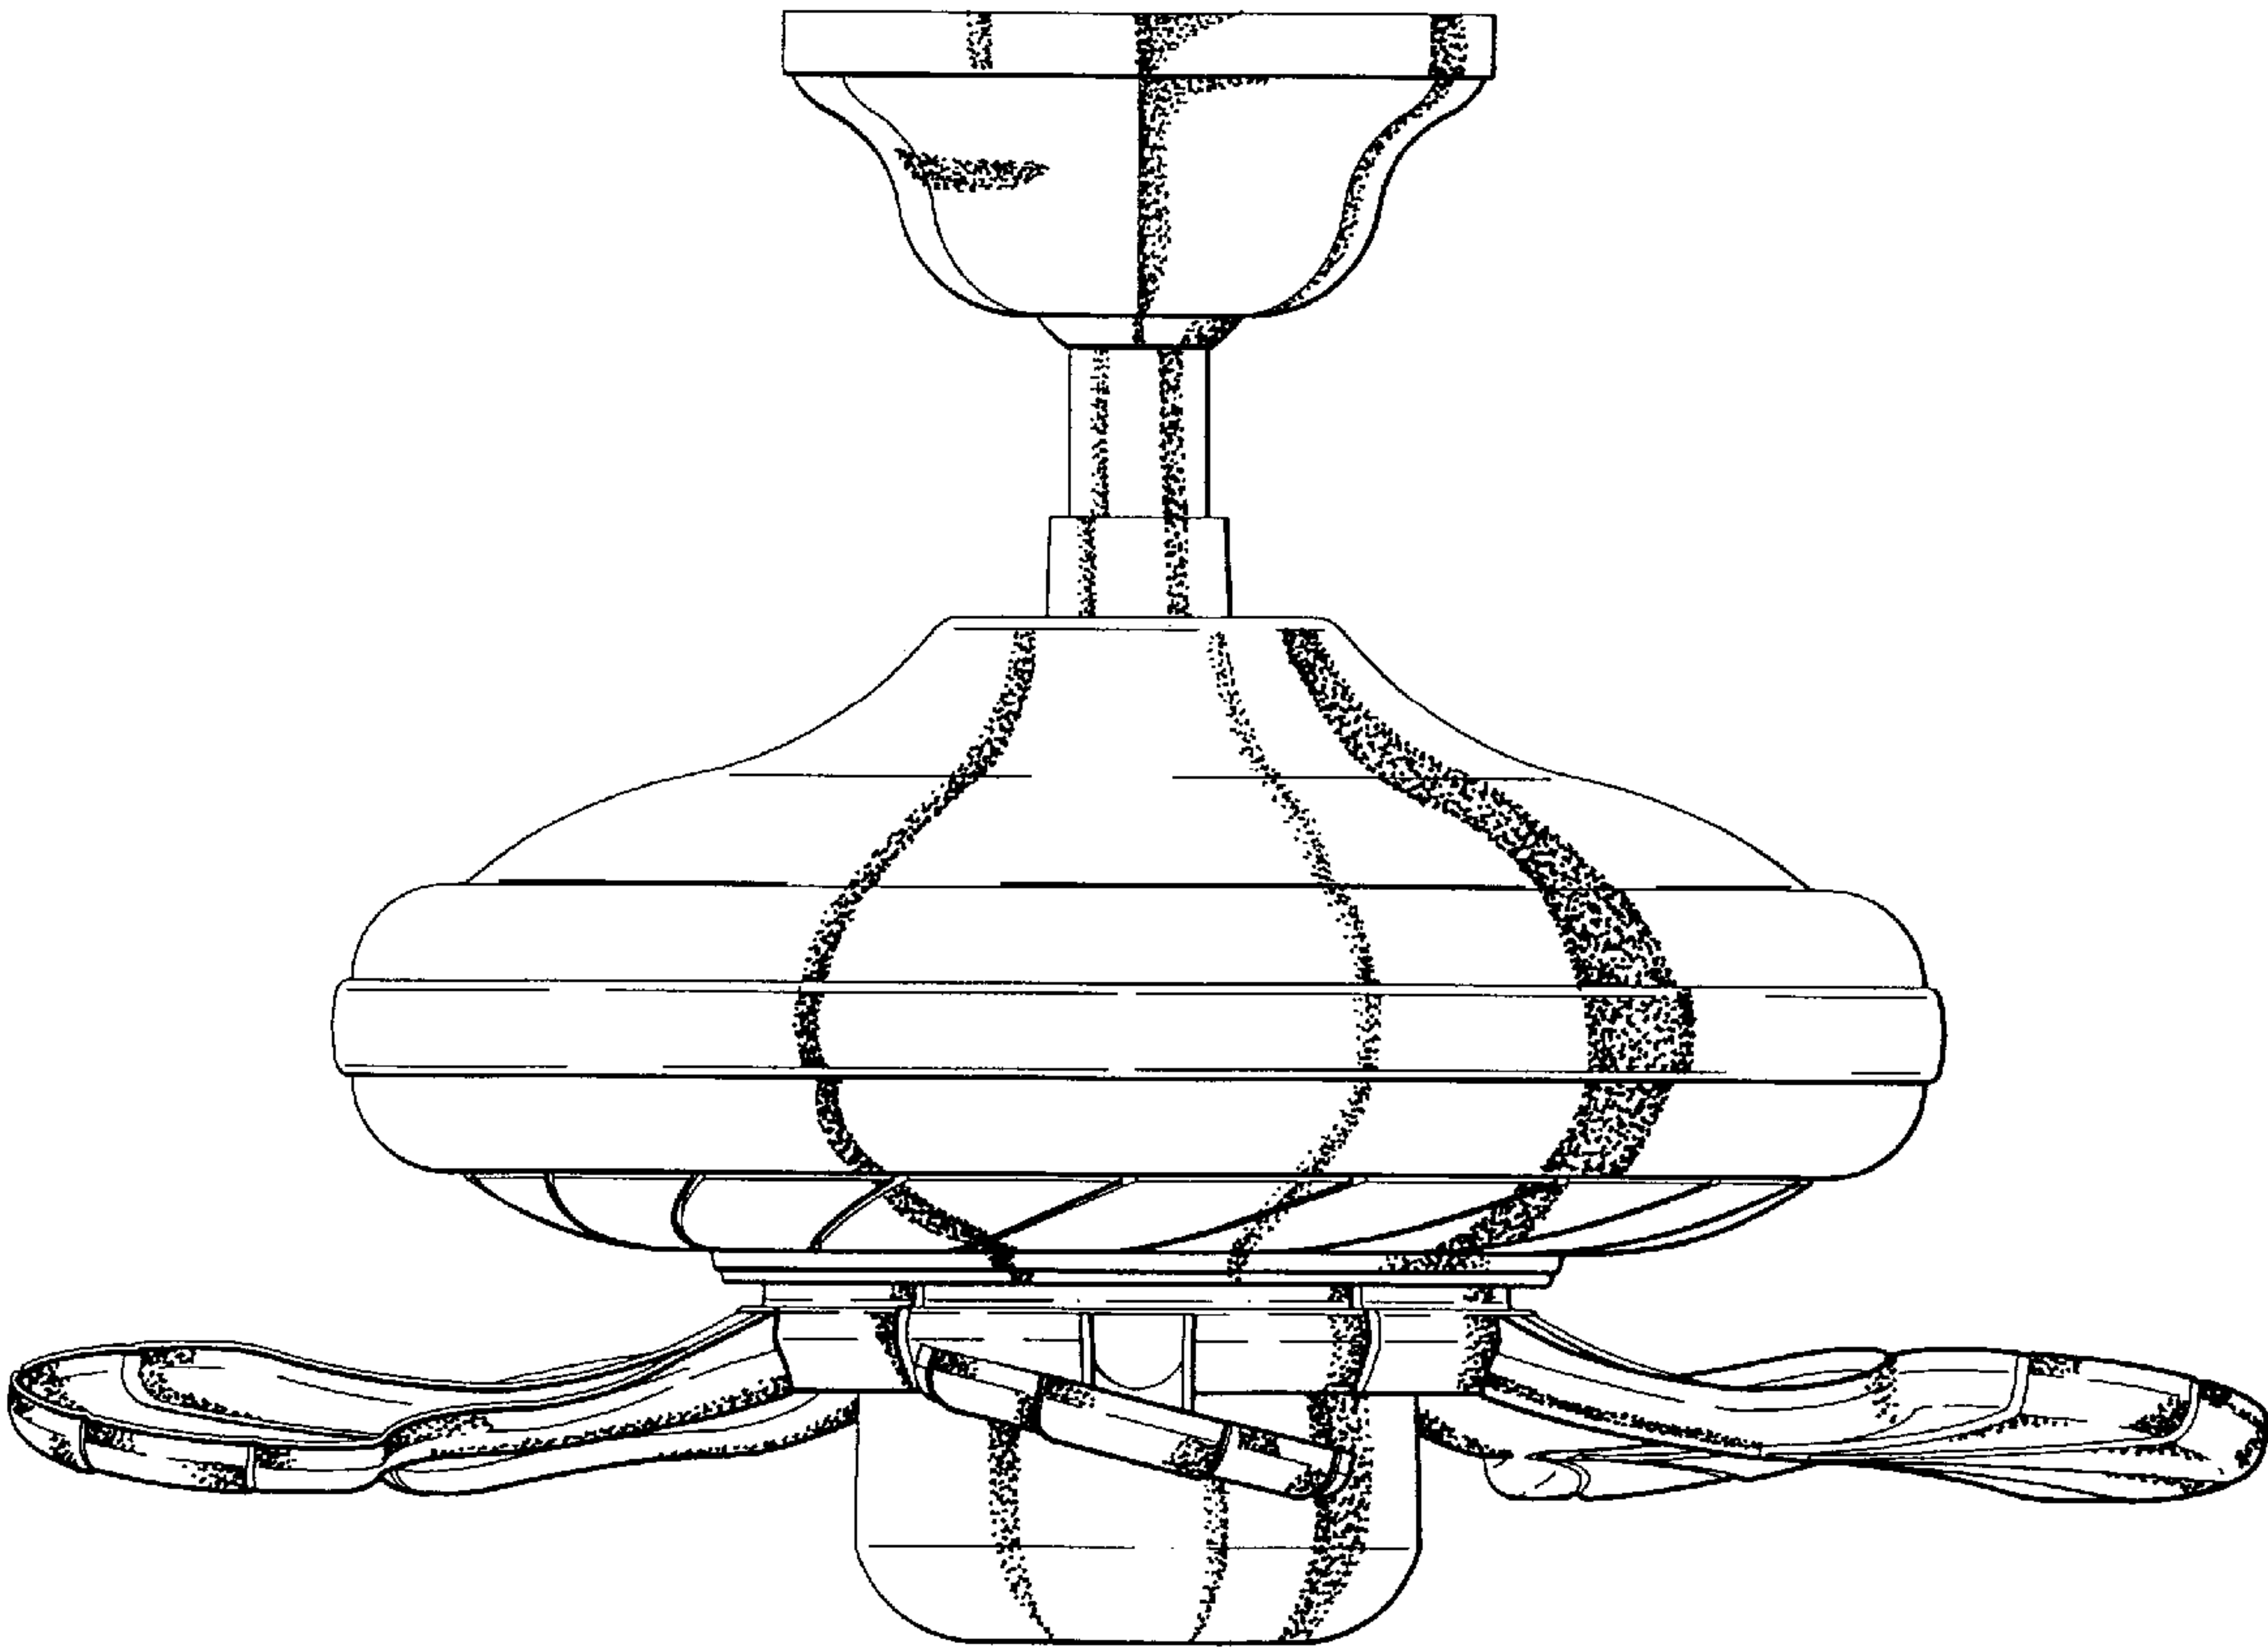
is a perspective view of a combined mounting canopy, motor and switch housing and blade irons unit for a ceiling fan showing my new design; FIG. 2 is a front view thereof; FIG. 3 is a right-side view thereof; FIG. 4 is a rear view thereof; FIG. 5 is a left-side view thereof; FIG. 6 is a top view thereof; and, FIG. 7 is a bottom view thereof.
